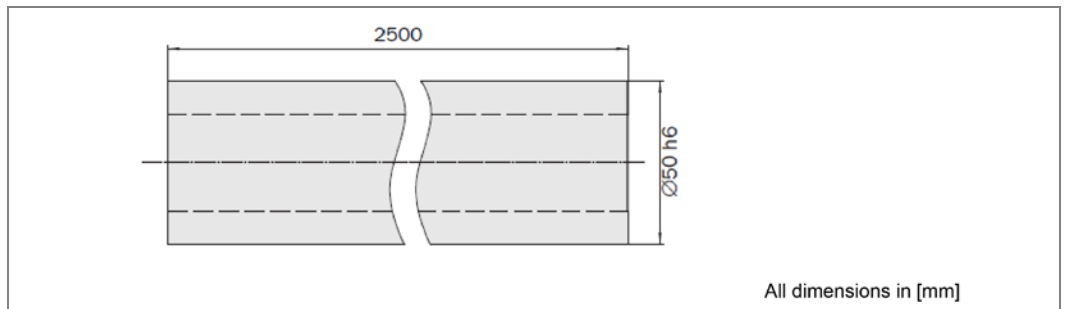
Dimensional drawing of the hollow shaft for mounting the VMD
